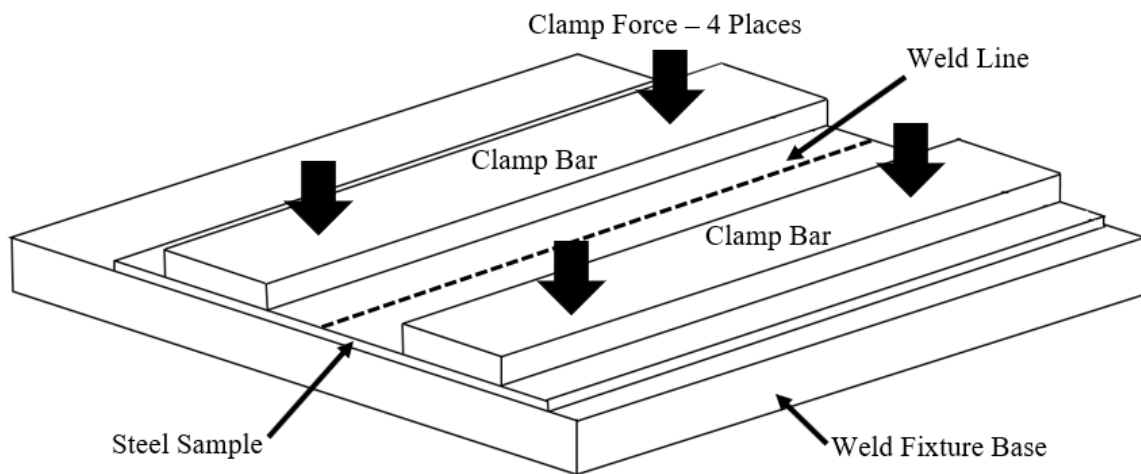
Weld Fixture used for laser welding flat steel samples. The sample was clamped on either side of the weld.
